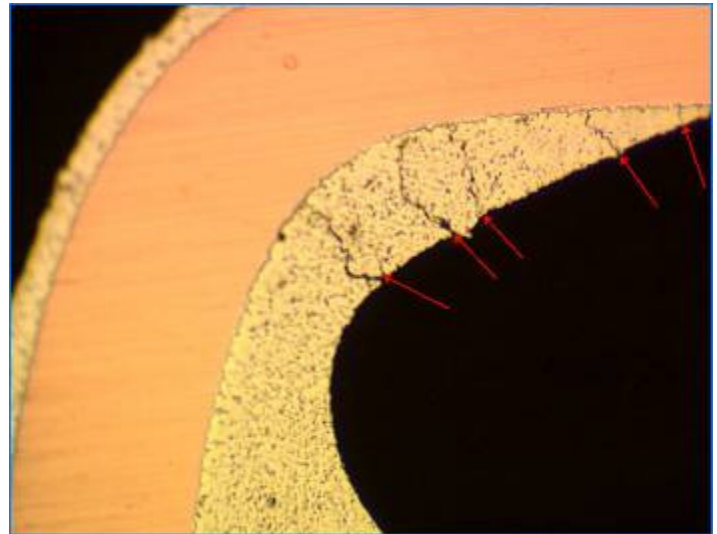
cross section, SN63, U20, left lead and solder crack and void, 200xb
